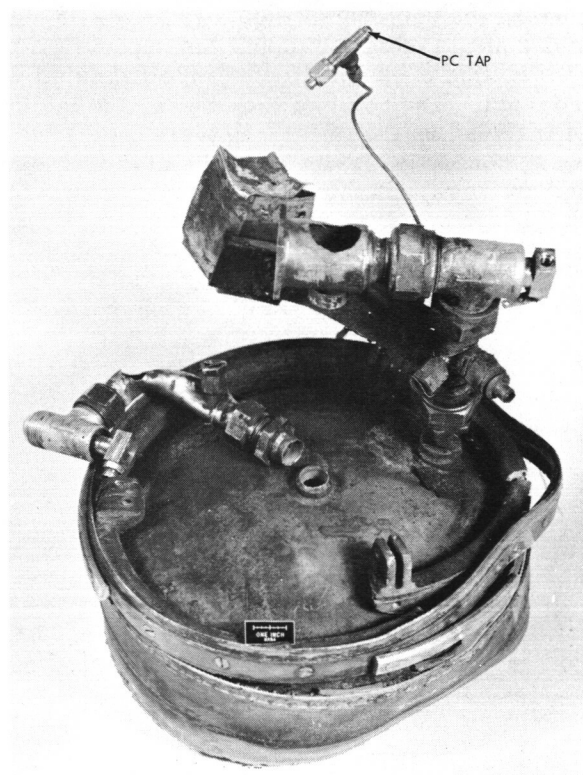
Flight 4.113GA-GI - Aft Fuel Tank Bulkhead Showing Burned Aniline Deposits
